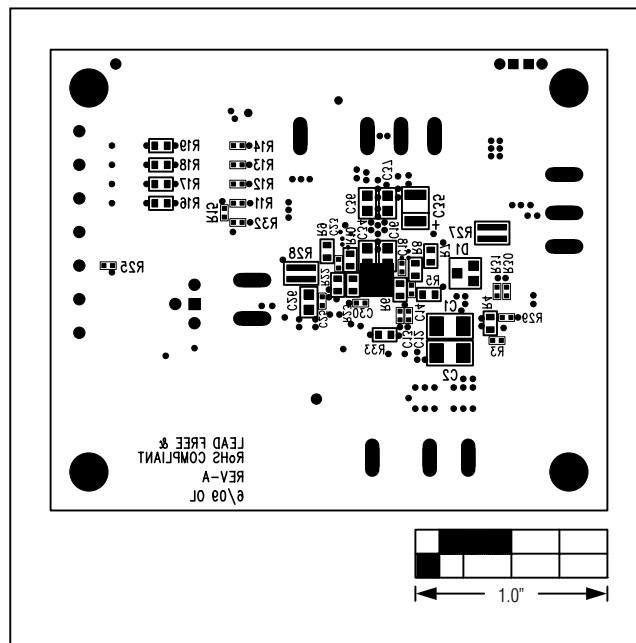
MAX17019 EV Kit Component Placement Guide—Solder Side
